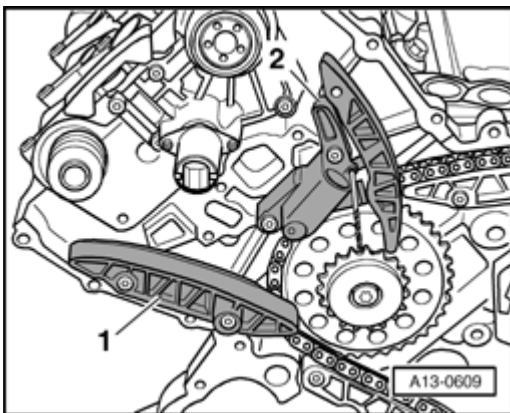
Removing Glide Track At Left Cylinder Head & Chain Tensioner
